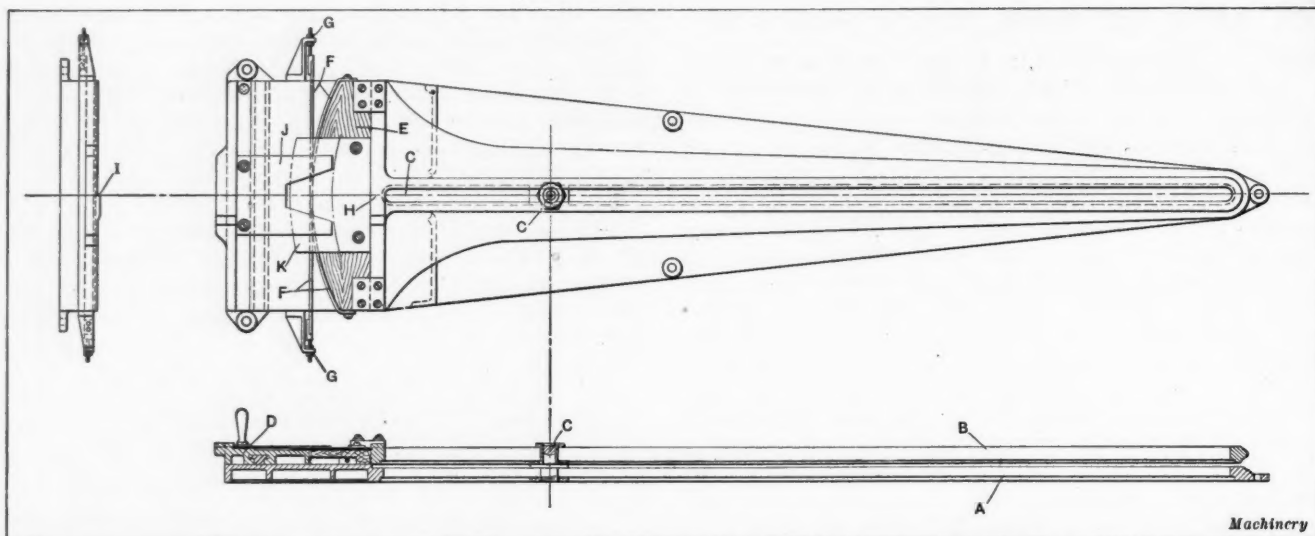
Instrument for drawing Involute Curve Outlines for Gear-tooth Templets or Forming Tools, with Swinging Arm B in Central Position
